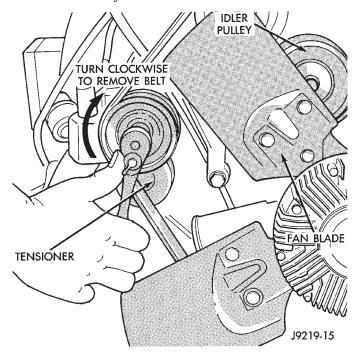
Belt Tensioner Assembly—5.2L Engine
